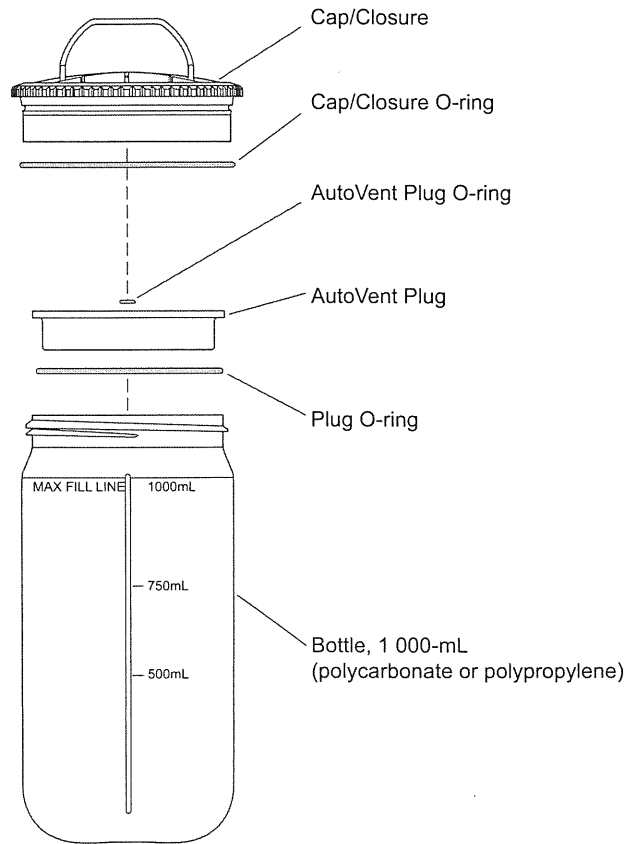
1 000-mL Bottle Assemblies Used in the JLA-8.1000 and JLA-9.1000 Rotor Assemblies. See the SUPPLY LIST for part numbers.
